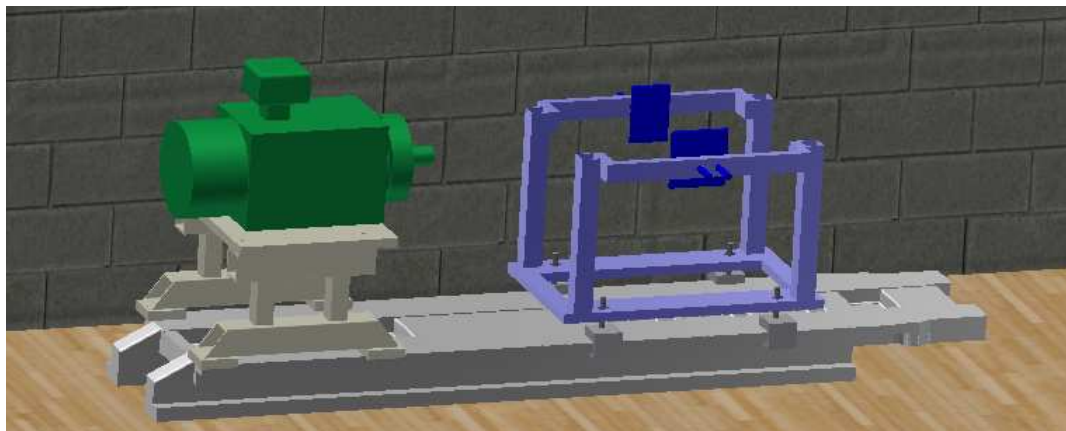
Supporting base with mounted electric drive motor and engine support cradle
